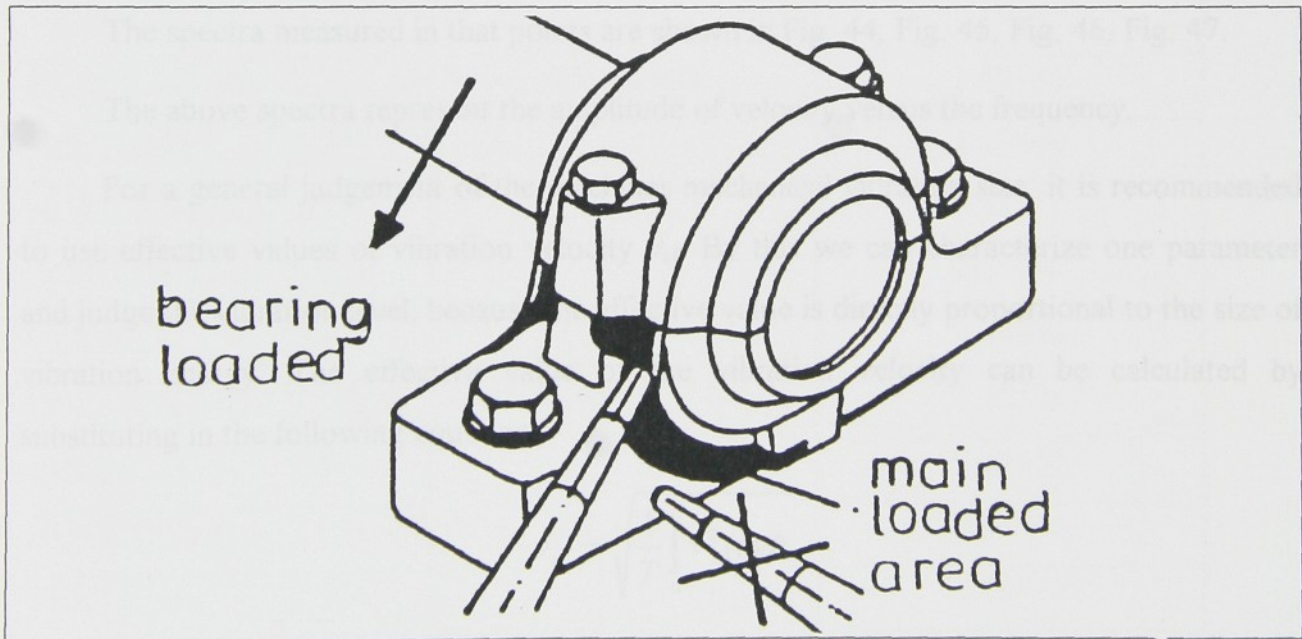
The measurement place must lay in the loaded area of the bearing.
